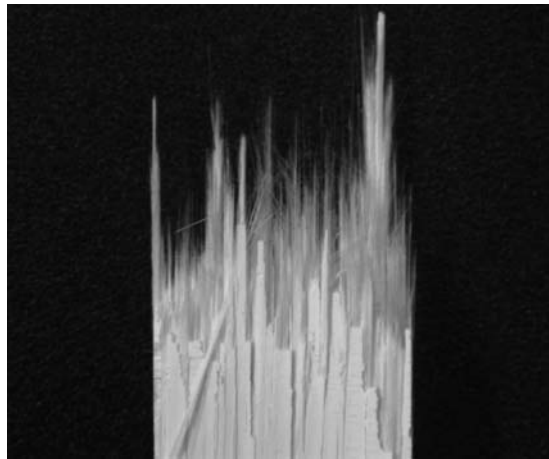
Tensile Fracture Surface of N610/Monazite/Alumina at 1200°C
